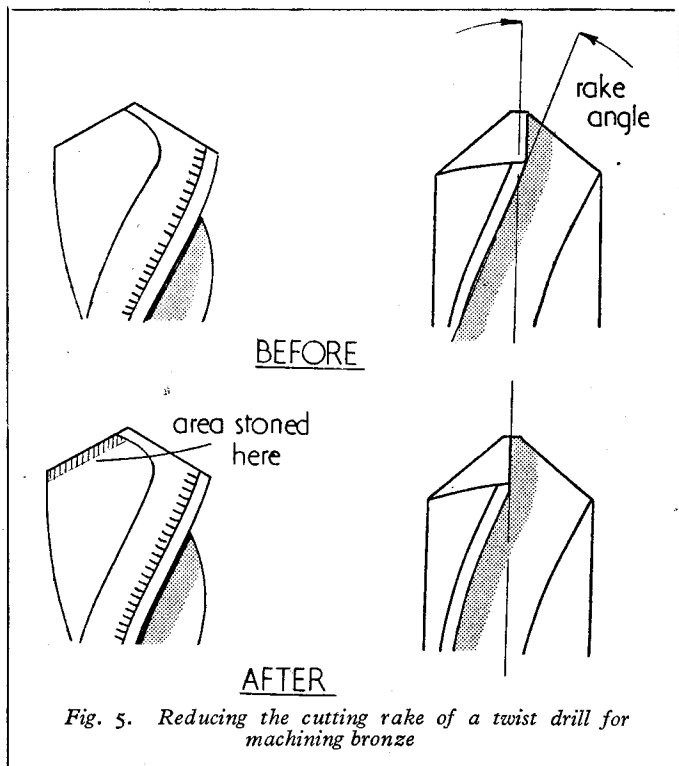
Reducing the cutting rake of a twist drill for machining bronze
